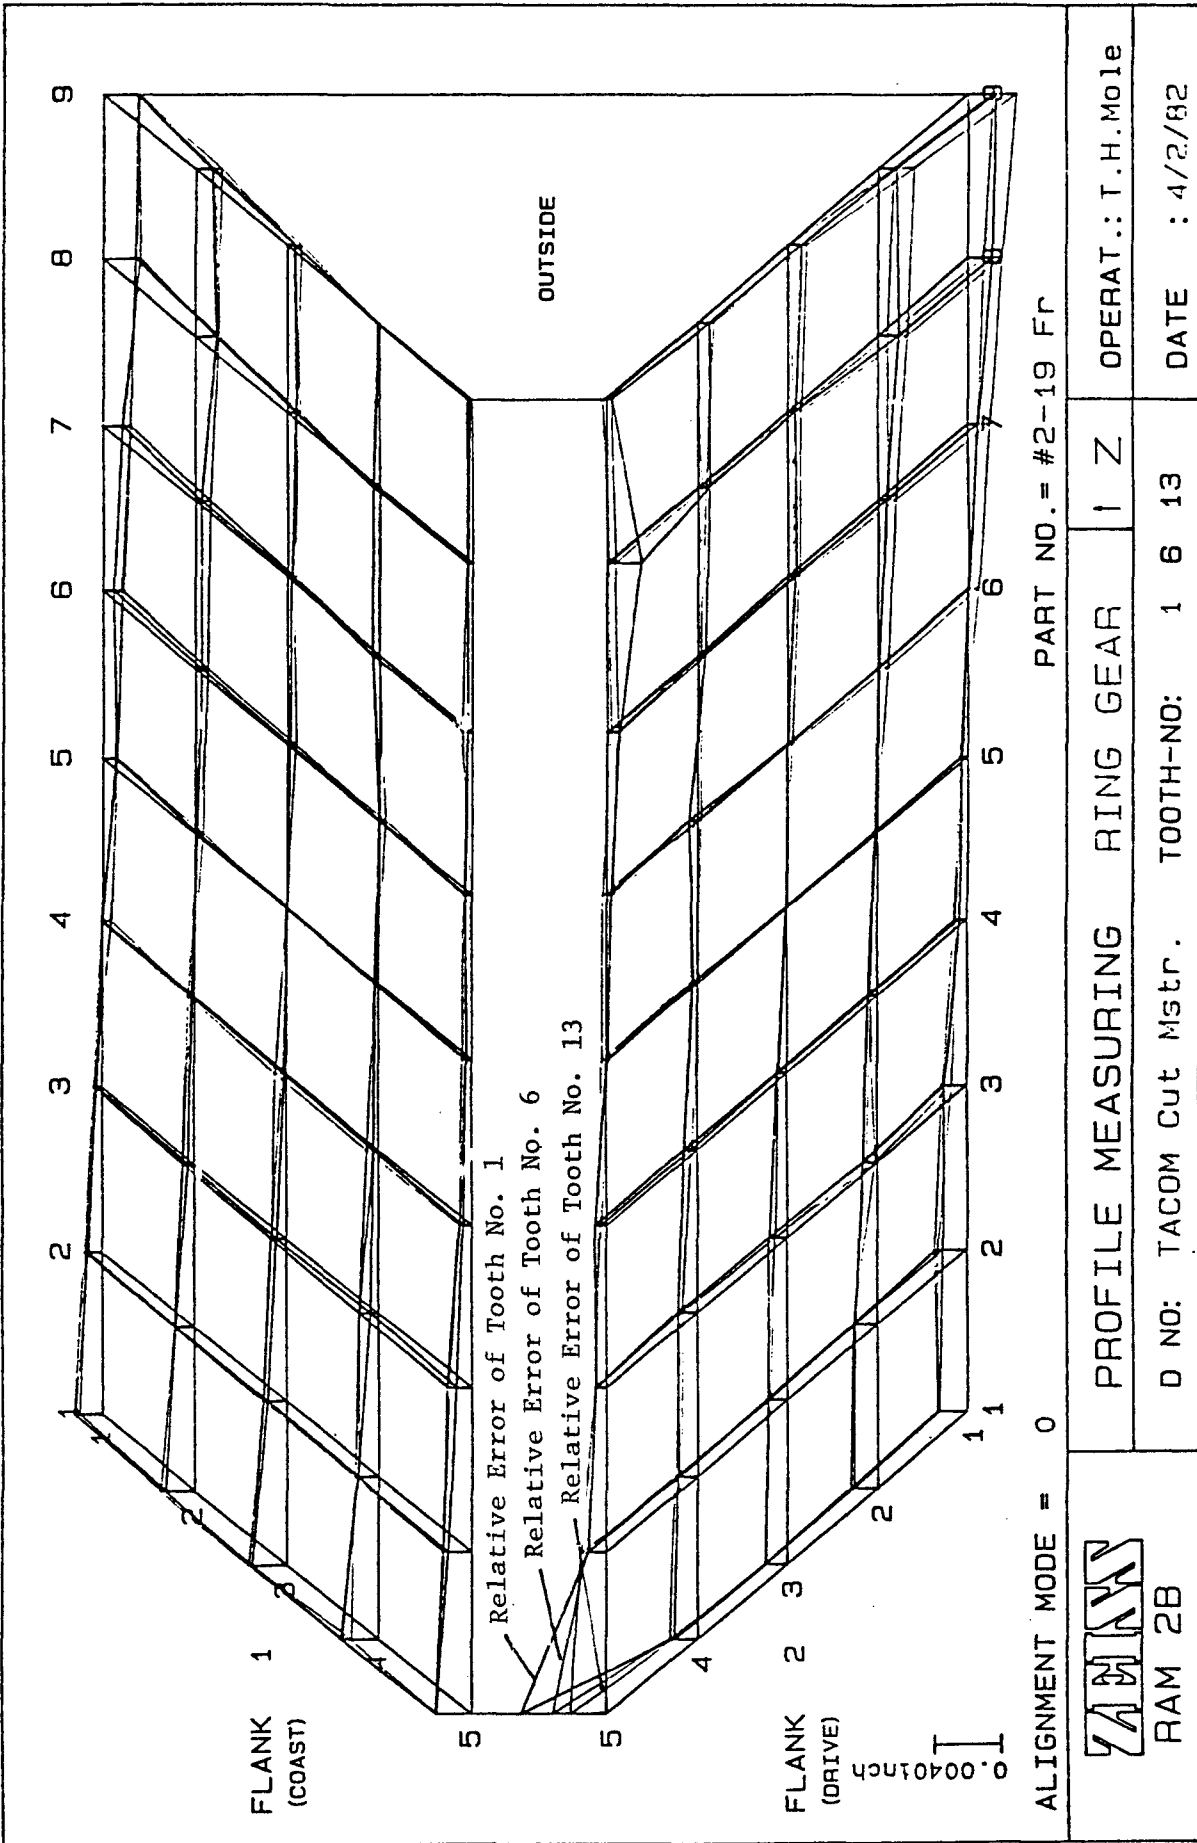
Zeiss Gear Tooth Plots, Graphically Illustrating the Tooth Form Variation of Forged Gears Versus the Cut Master Gear
